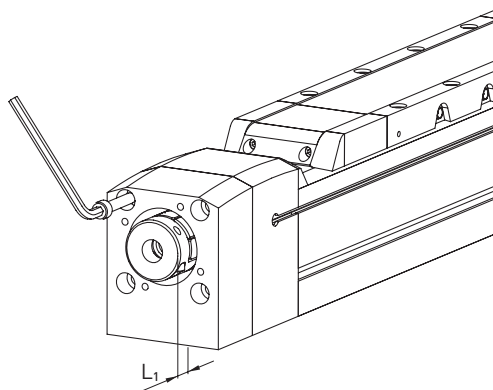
Mounting the clamping hub and the coupling housing KB on the HM-S linear axis
